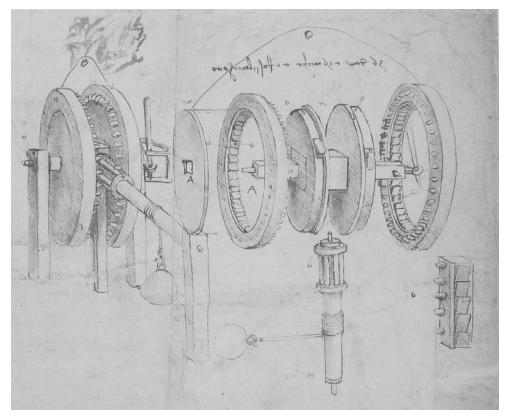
The two-wheel hoist in the form of an exploded view [Institute and Museum 2005]
